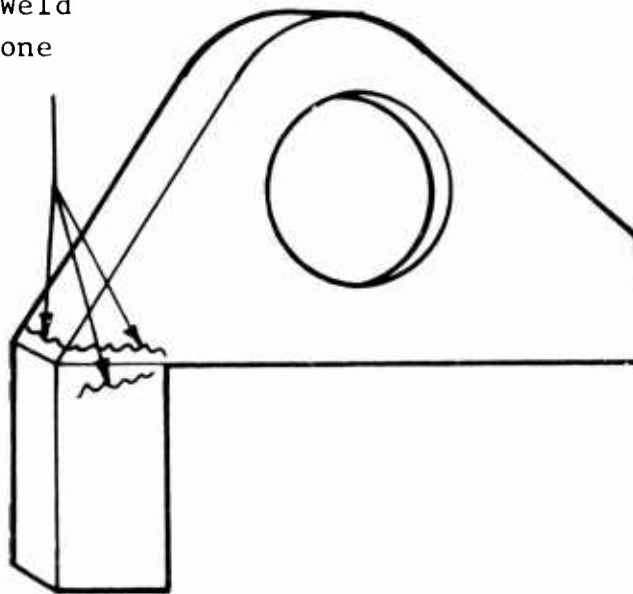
Showing Crack Locations in Weld Affected Zone of the Cold-Side Gusset, 0.015-Inch Stock Al10AT Titanium (Drawing 4012001-384P11) See Figure 11, Which Developed during Test.
